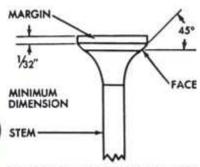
Valve face angle should be 45 degrees. Minimum valve head margin is 1/32-inch (0.8 mm).
